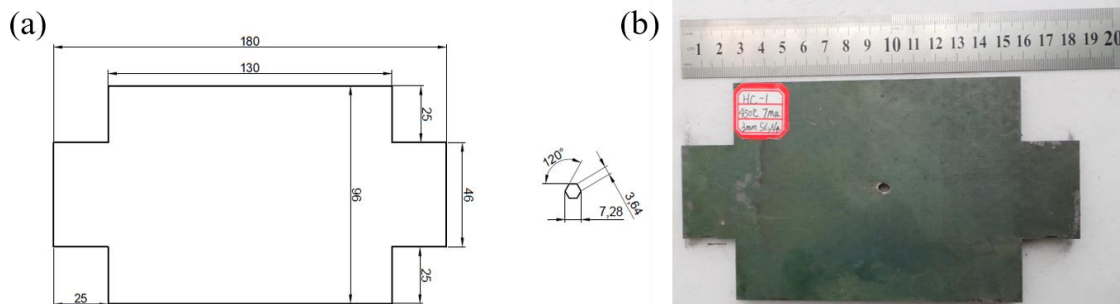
Honeycomb sandwich specimens (unit: mm) (a) Dimension (b) Photo after impact
